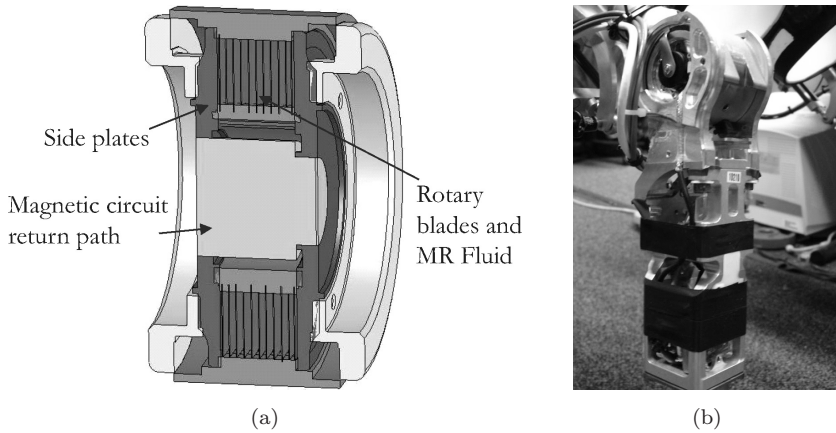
Knee variable damper. In (a), a section view of the knee sub-assembly is shown. One set of blades are grounded to the outside shell and another to the inside. When the knee rotates adjacent upper and lower blades move relative to one another, shearing the MR fluid between the blades. Using an electromagnet around the return path, a magnetic field can be modulated through the rotary blade plus MR fluid gaps, so as to change knee damping. In (b), the knee variable damper is shown mounted on the exoskeleton leg.
